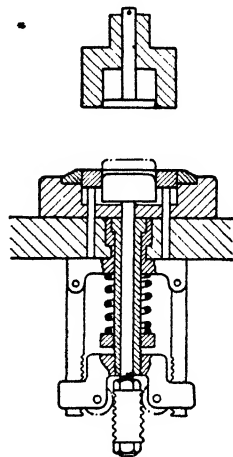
The Rhoades simplex attachment drives the punch upward by means of a reversing gearing approximately as shown.
